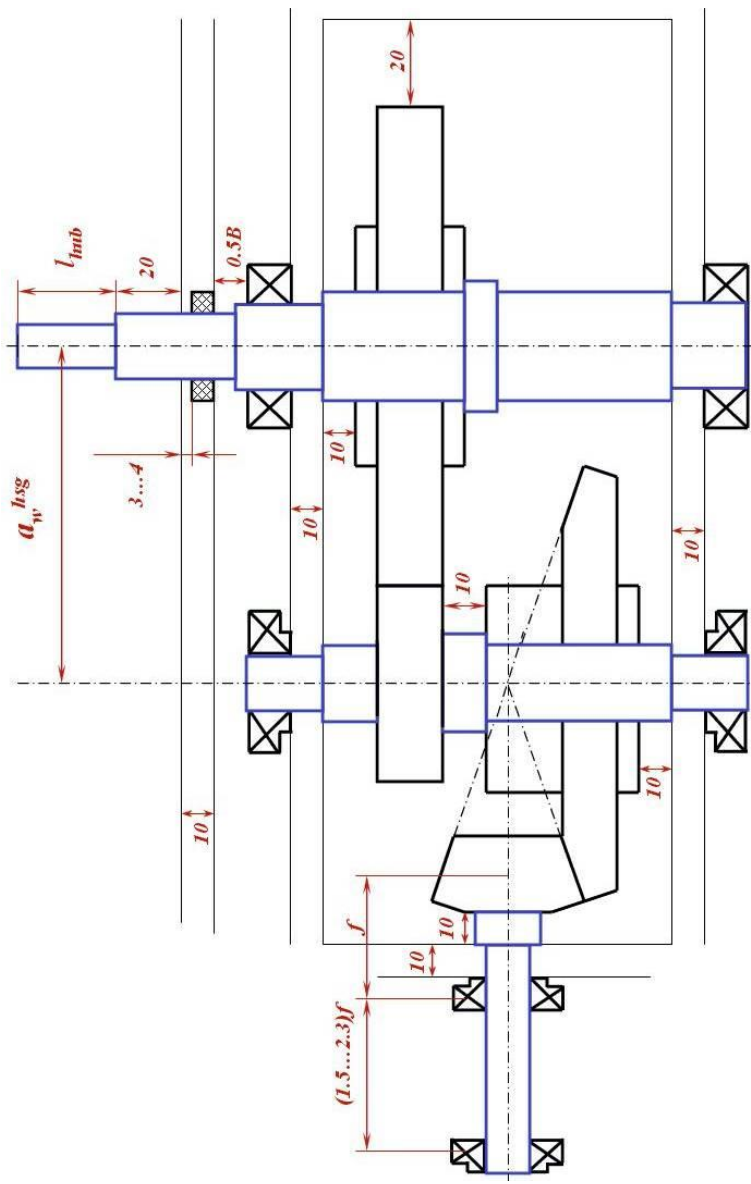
Sketch layout of double stage bevel and spur gear speed reducer
